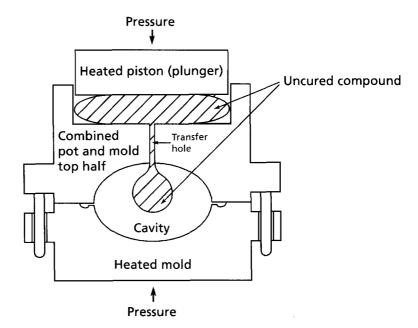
Conceptual cross section through a transfer mold - compound moving from pot to cavity (courtesy of the Holz Rubber Company)
